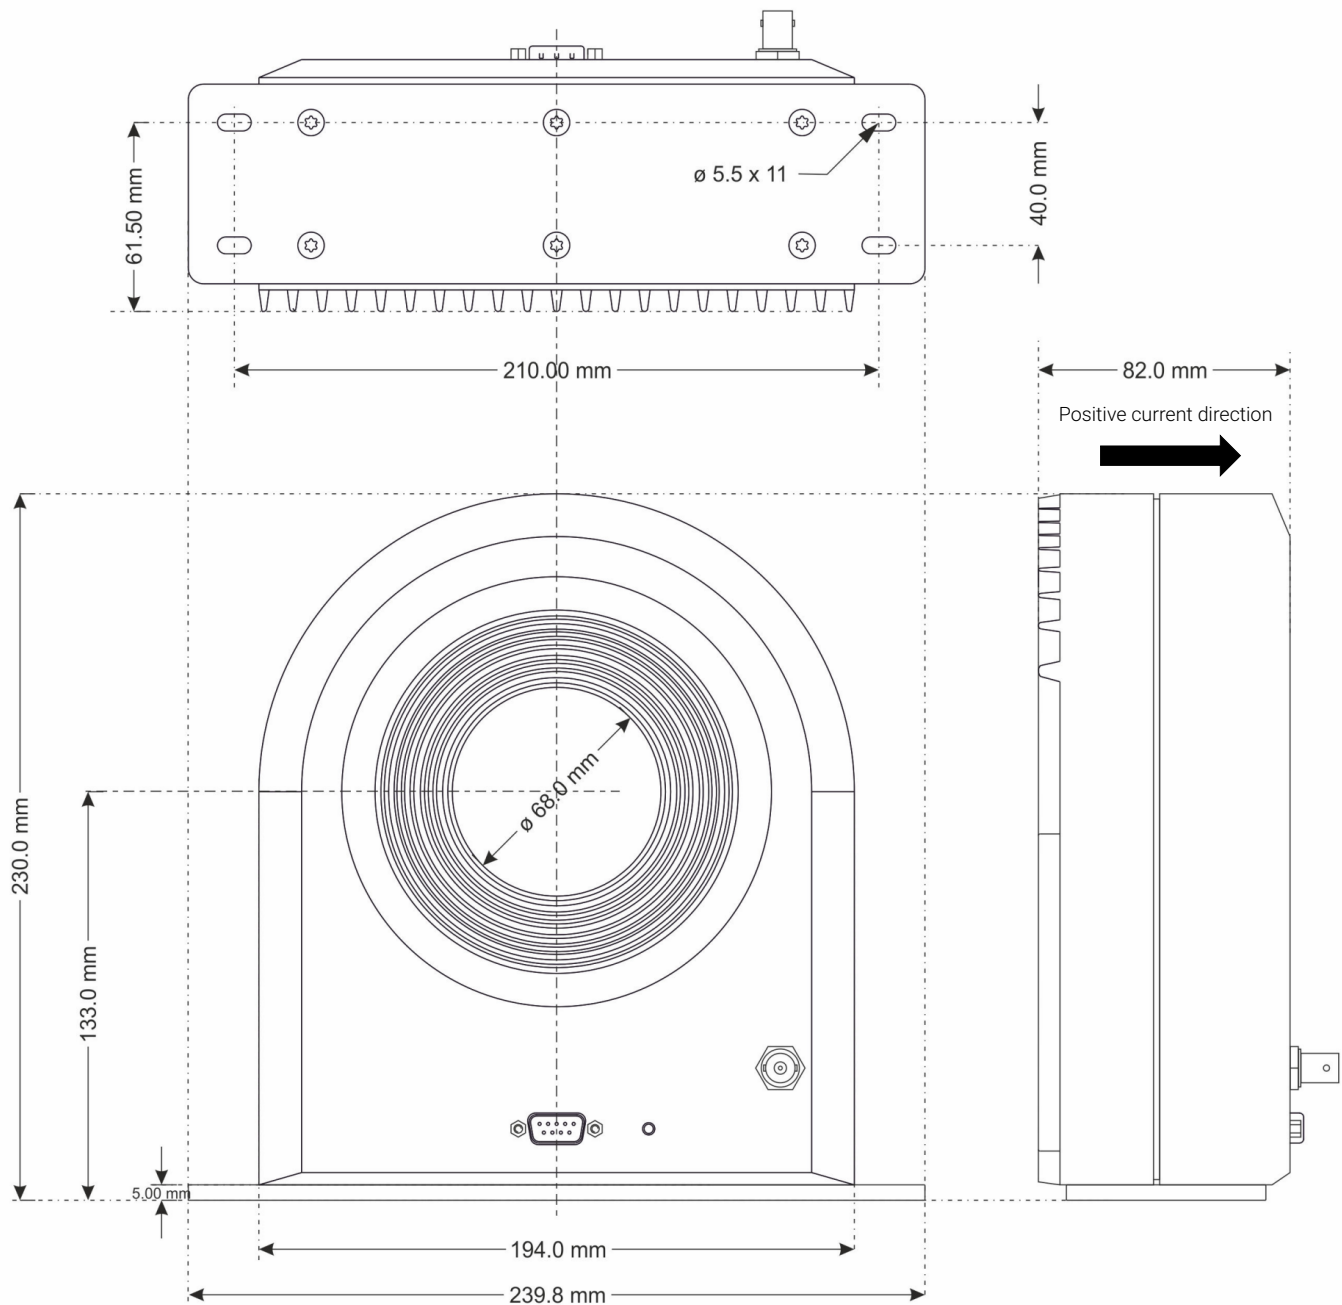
Dimensions of transducer. 0.3 mm Tolerance
